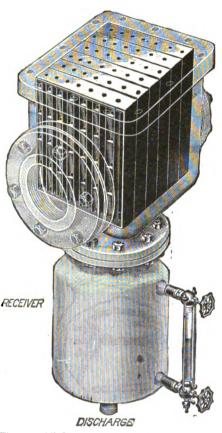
Oil Separator Consisting of Vertical Plates with Openings (living Steam a Zigzag Course.
